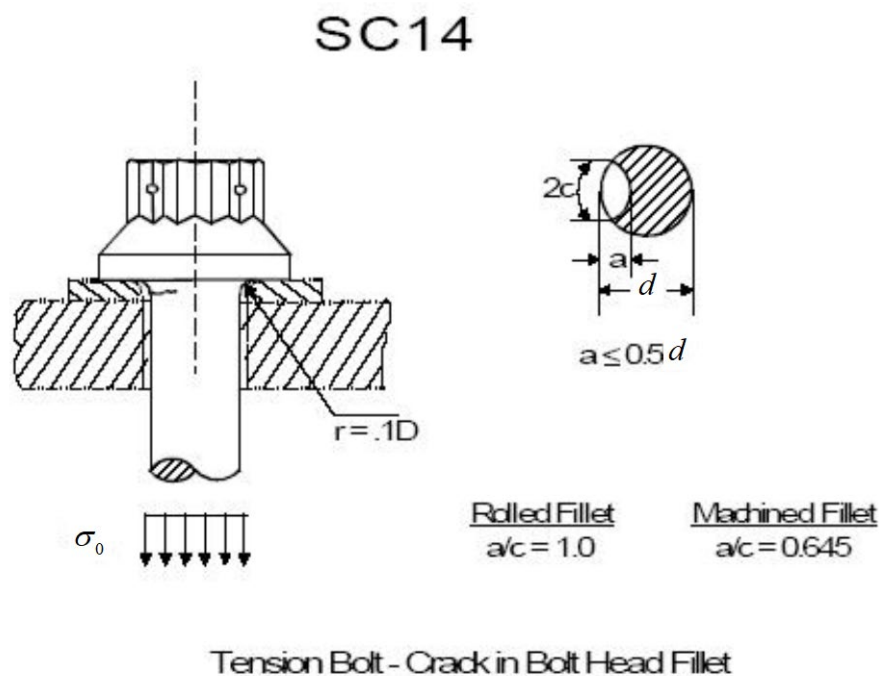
ESACRACK Model of a Fillet Crack under a Fastener Head
